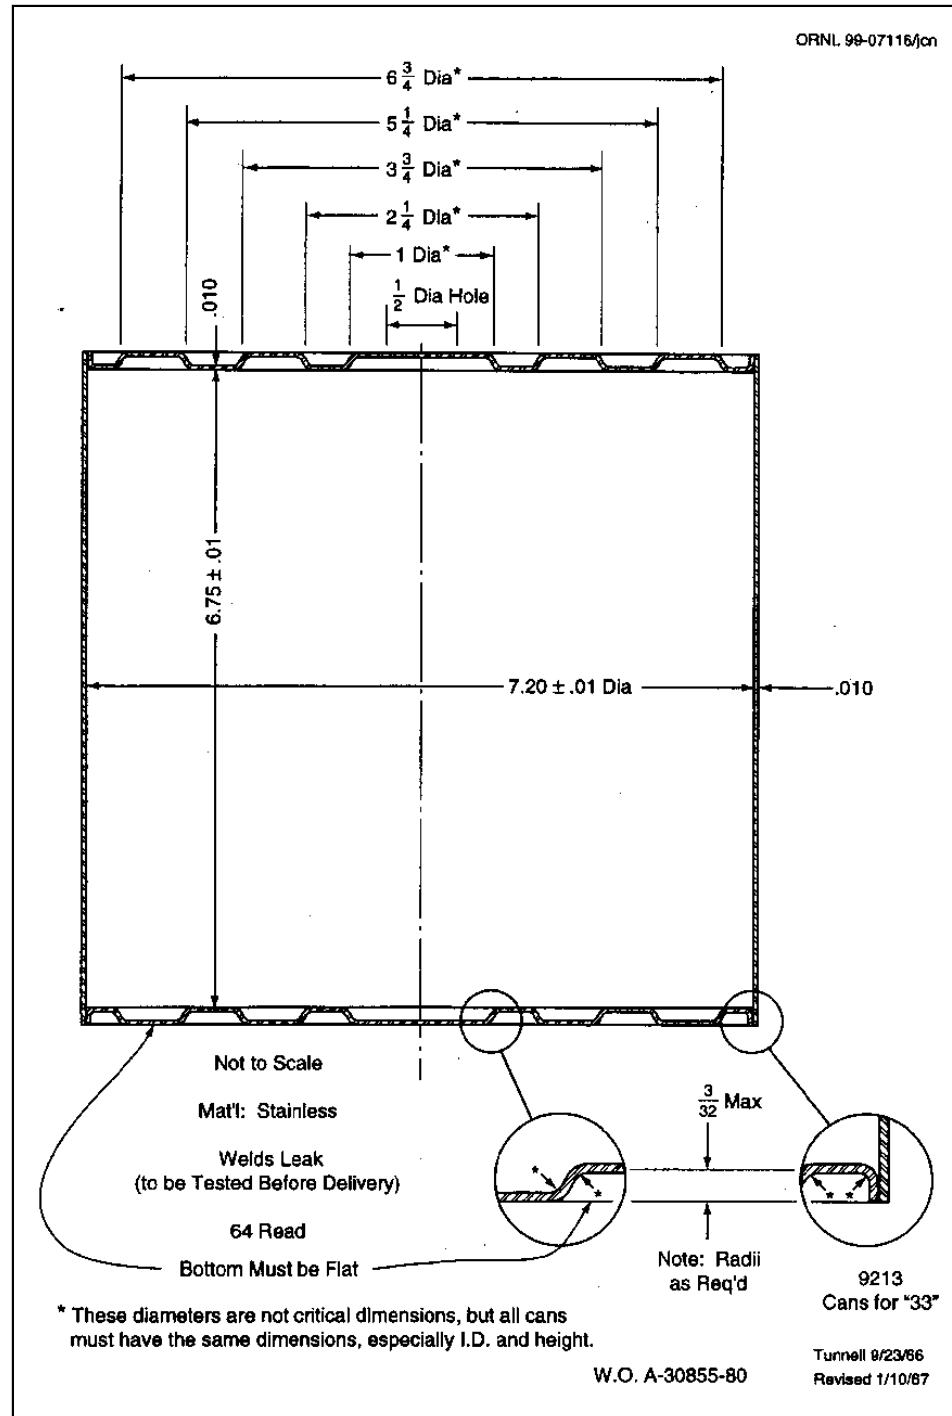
Details of stainless steel solution containers (dimensions in inches).
